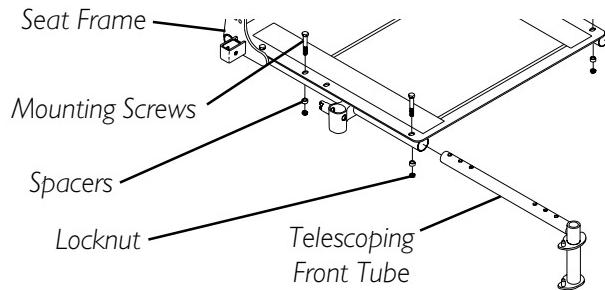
ADJUSTING/REPLACING TELESCOPING FRONT RIGGING SUPPORT
